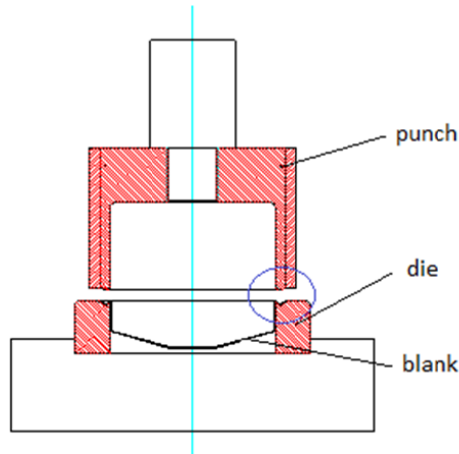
Schematic of tool for deep drawing of the wreath on the large diameter
